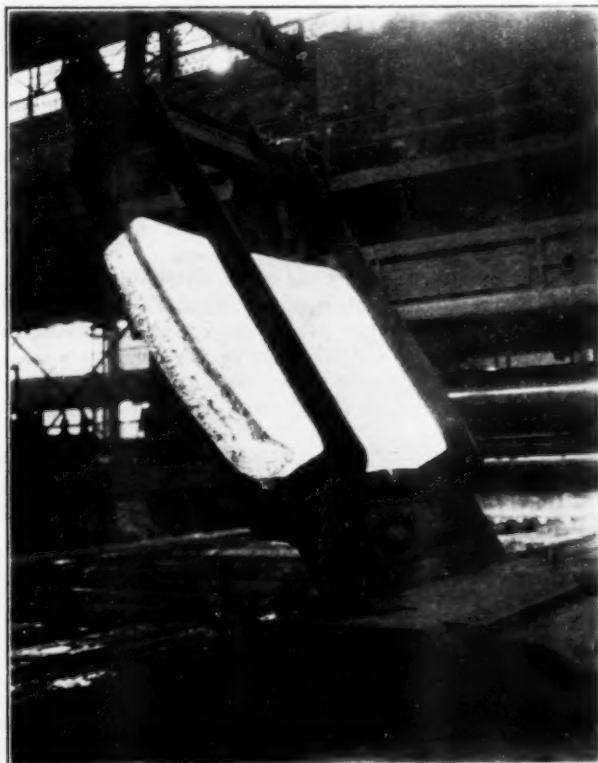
PLATE-TURNING DEVICE ON 206-IN. MILL TABLE
